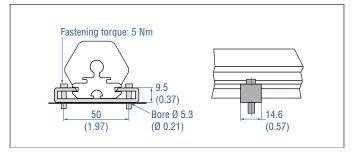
Mounting clamps (part no. 400 802) with cylinder screw M5×20
